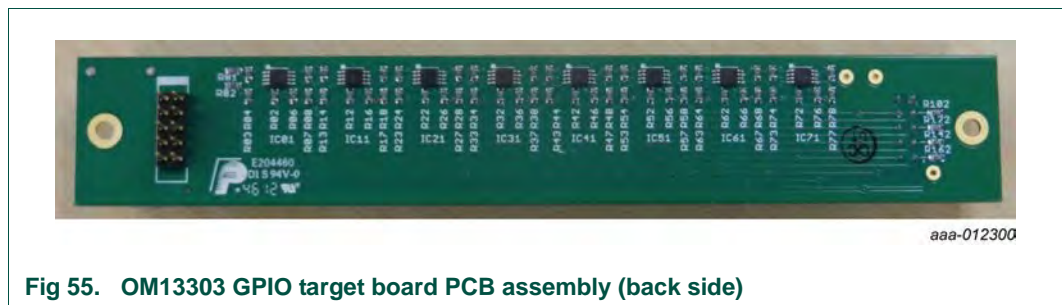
OM13303 GPIO target board PCB assembly (back side)
